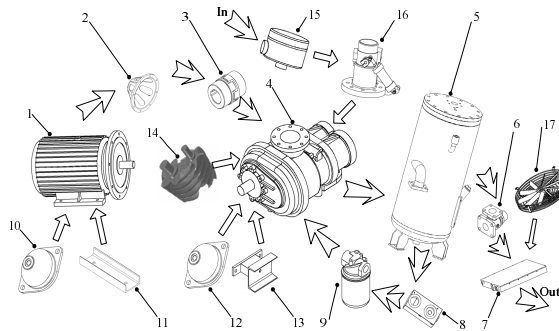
Main components and schematic diagram of the screw air compressor of LG-6.7/10
